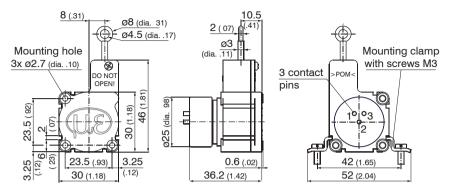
Dimensional drawing WPS-  $\dots$  -50MK30 with potentiometer or encoder, dimensions in mm (inches), not to scale
